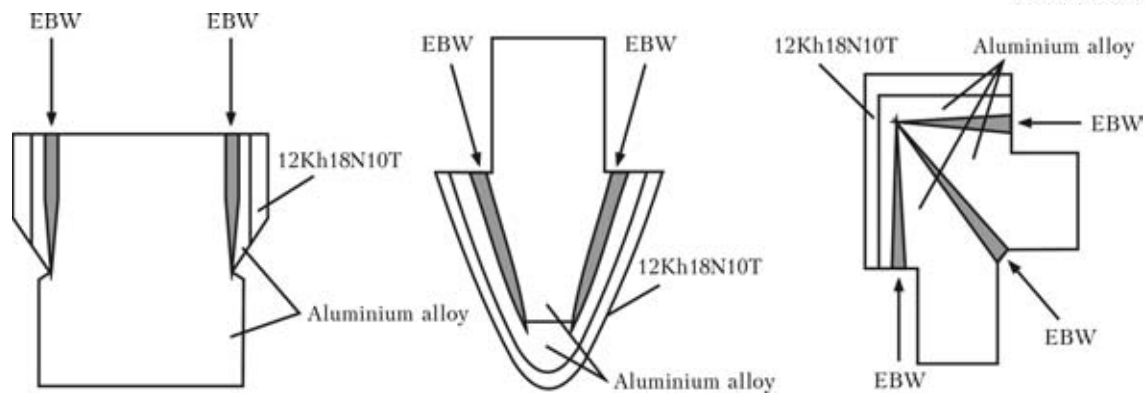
Schemes of welded joints of transition pieces of large thickness
